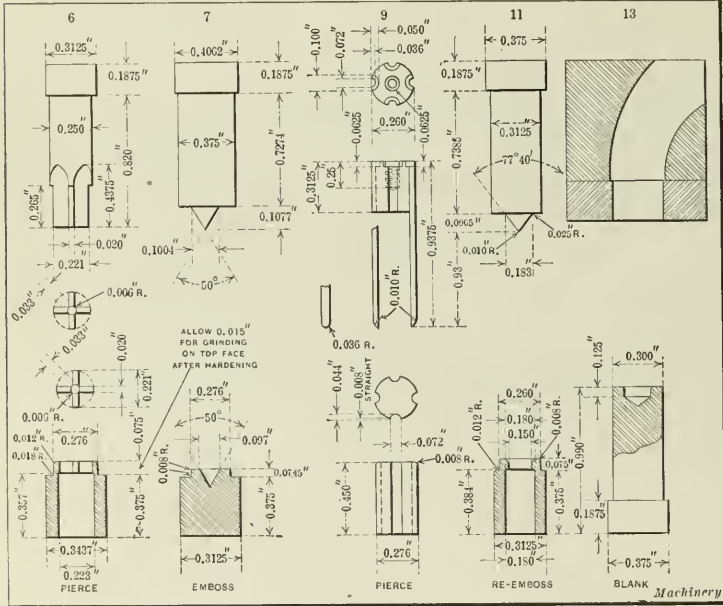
Piercing, Embossing and Blanking Tools for Socket
